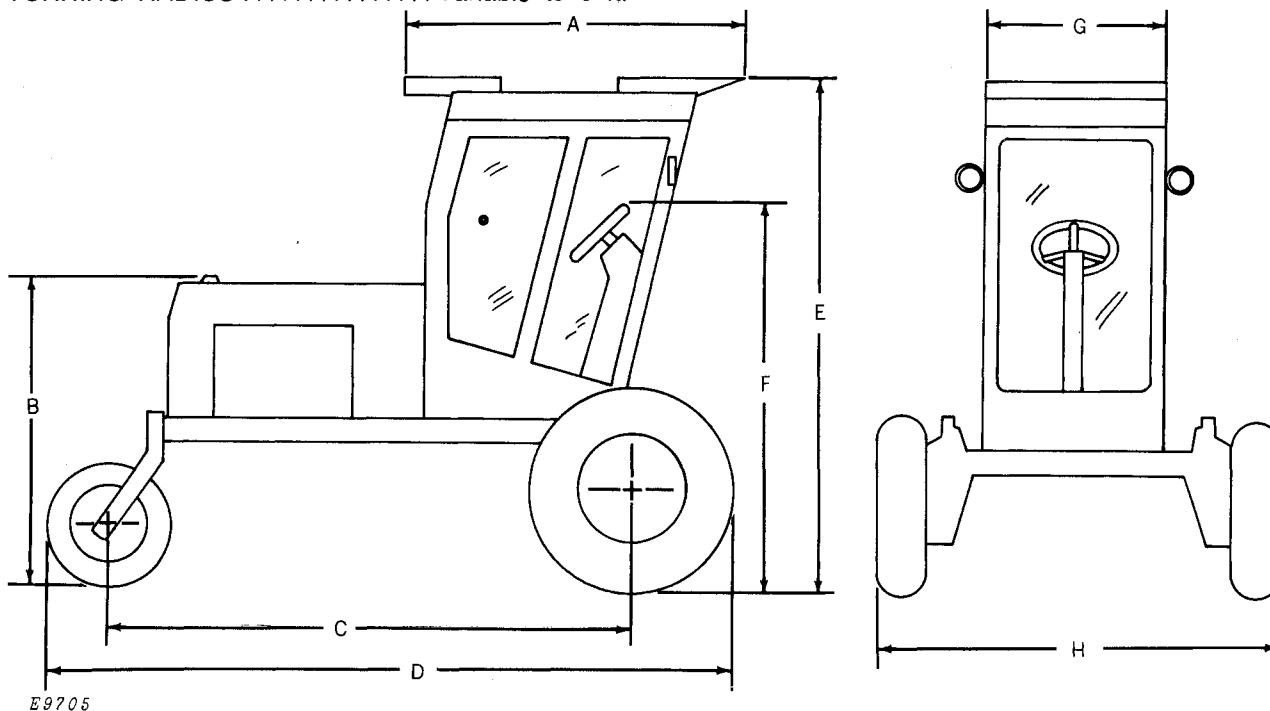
Dimensions of 2250 and 2270 Hydrostatic Drive Windrowers
